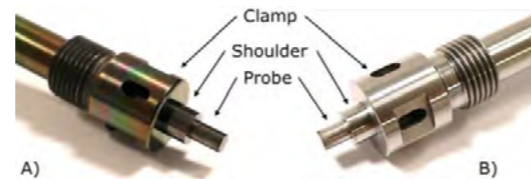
Featureless RFSSW tool components: A) Tool 1 and B) Tool 2.
